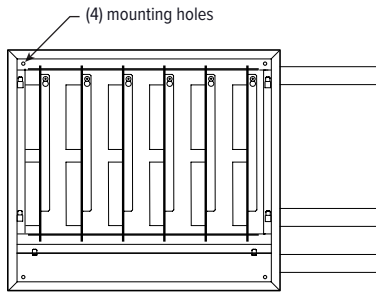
RDB1 Remote driver enclosure for single fixture
